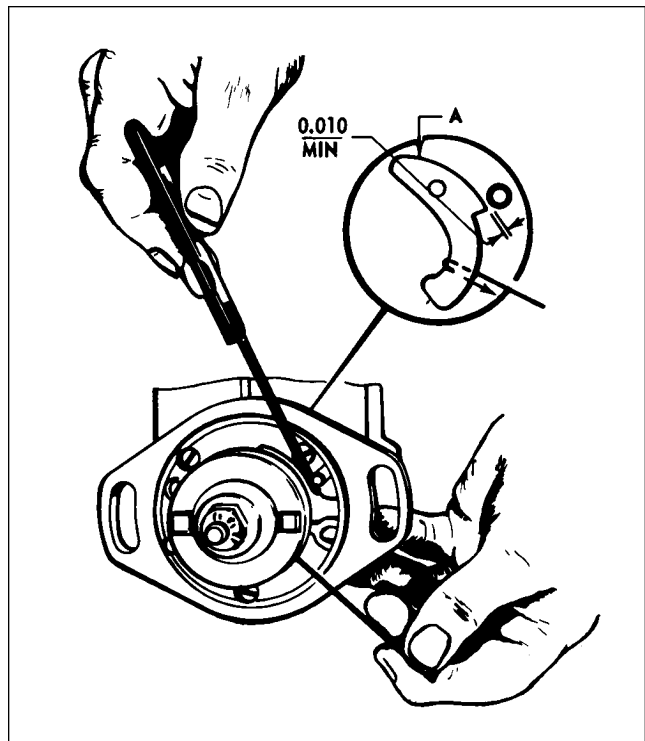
Checking Flyweight Clearance of Impulse Coupling
